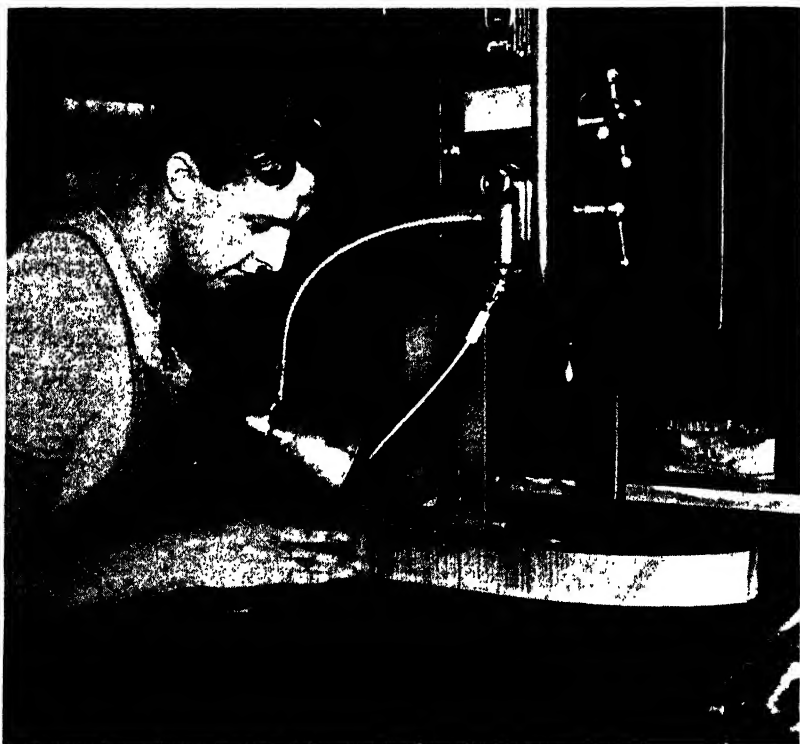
Tool-room Operation on a Sawing, Filing and Polishing Machine
